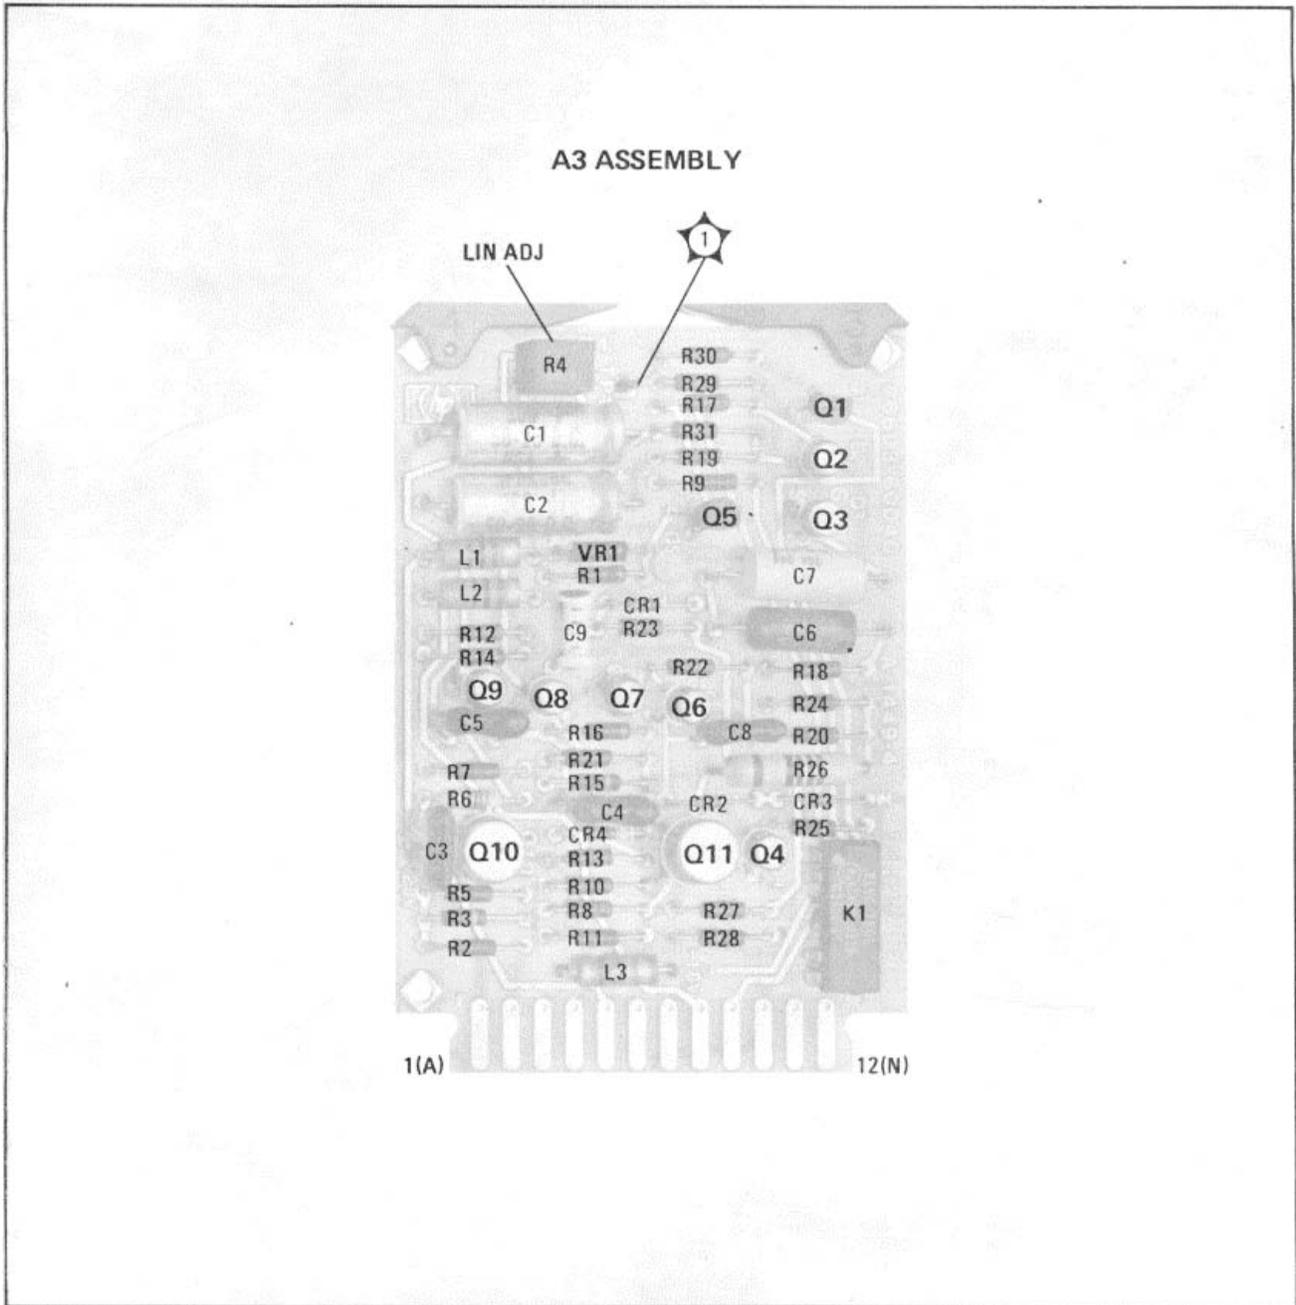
A3 ALC Amplifier Assembly Component and Test Point Locations
